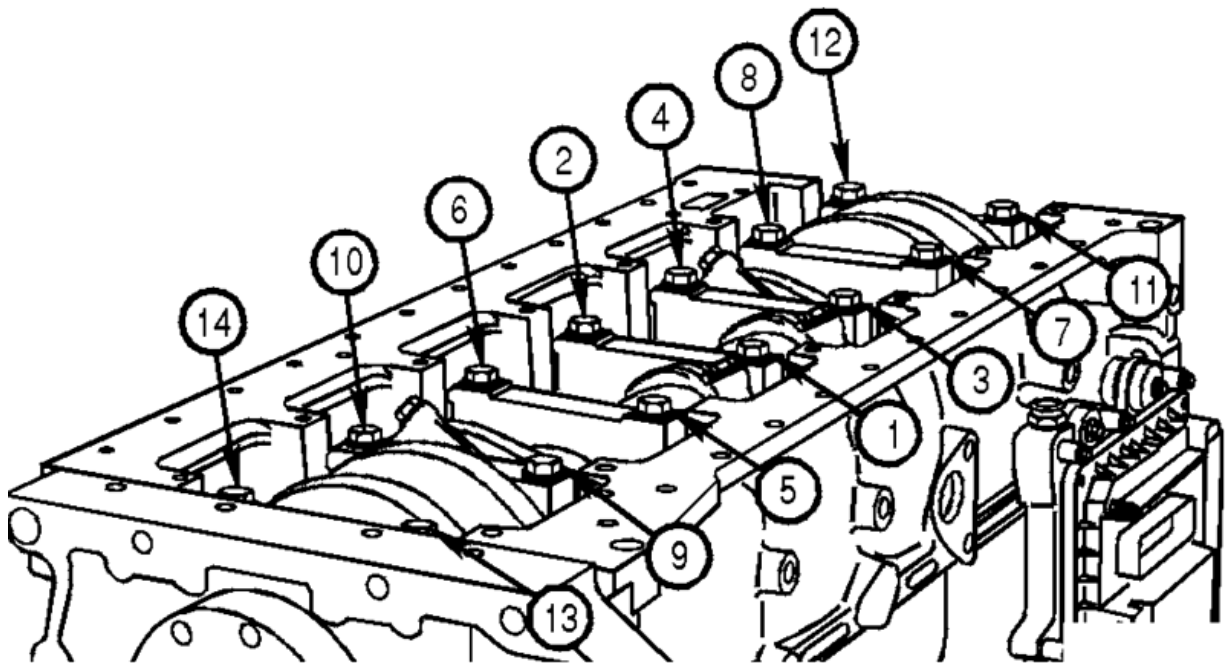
6.7L Main Bearing Bolt Torque Sequence
